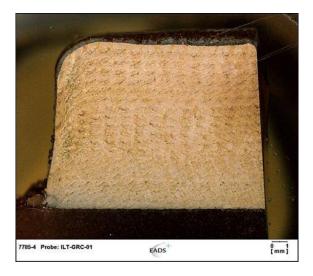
Combustion chamber liner material made by Fused Metal Deposition (EADS)
